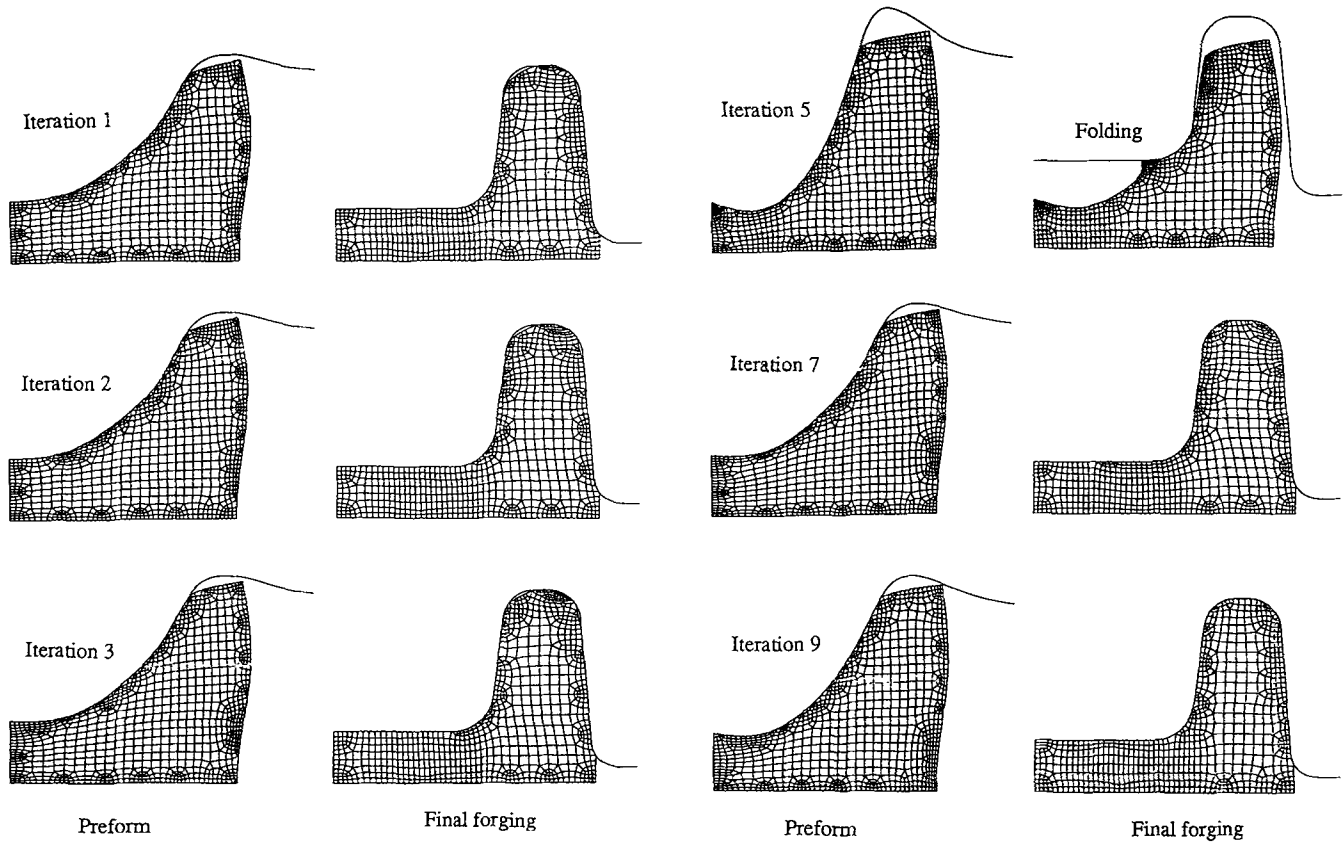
Preform and final forging shapes for an axisymmetric forging of cross-sectional H-shape
